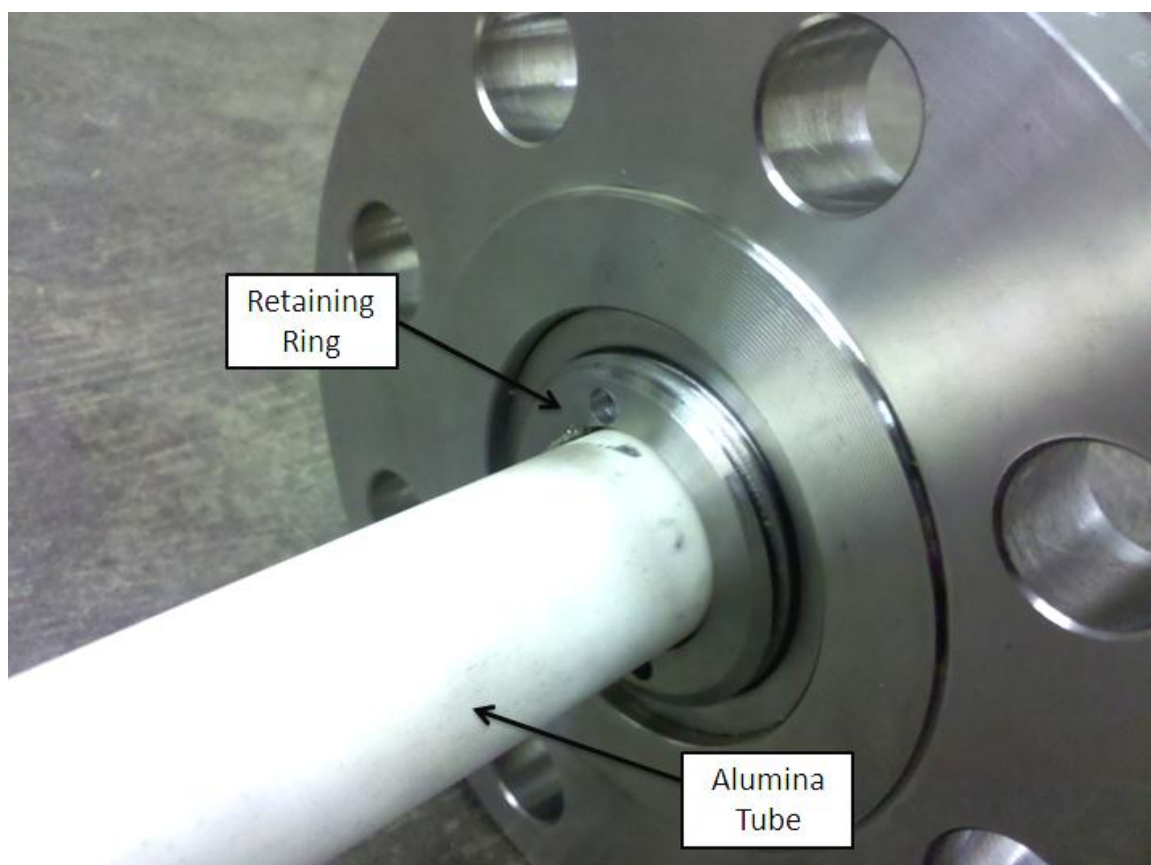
The retaining ring of tube diversion device. The ring compresses ceramic rope (not pictured) to hold the tube in place and to direct the purge flow down the interior of the tube.
